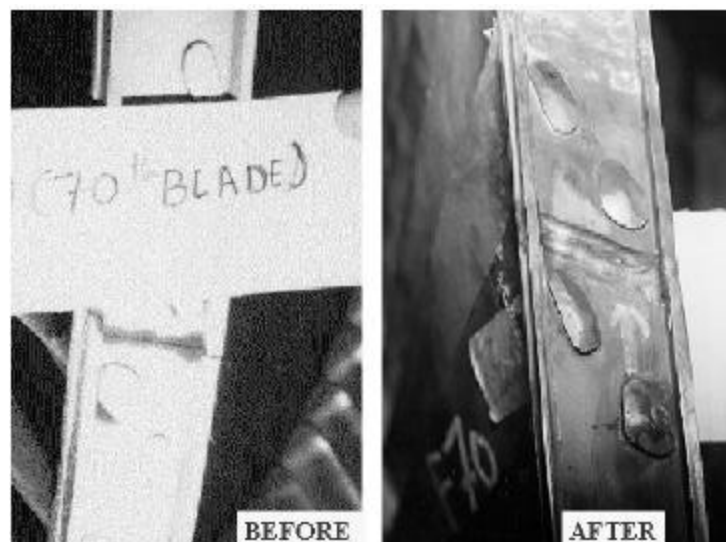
A cracked stage-III LP turbine shroud, before and after repair welding
